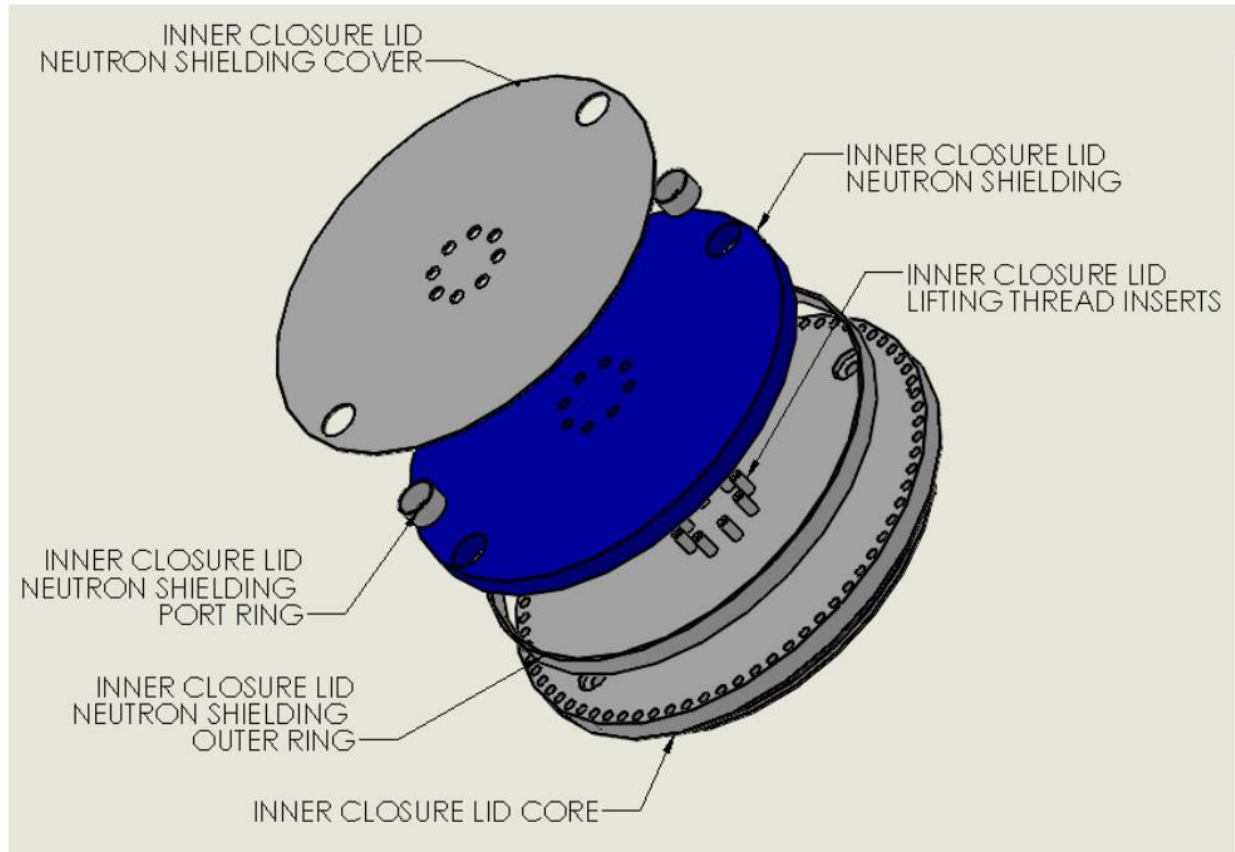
Inner Lid Assembly (shown only for illustrative purpose)
